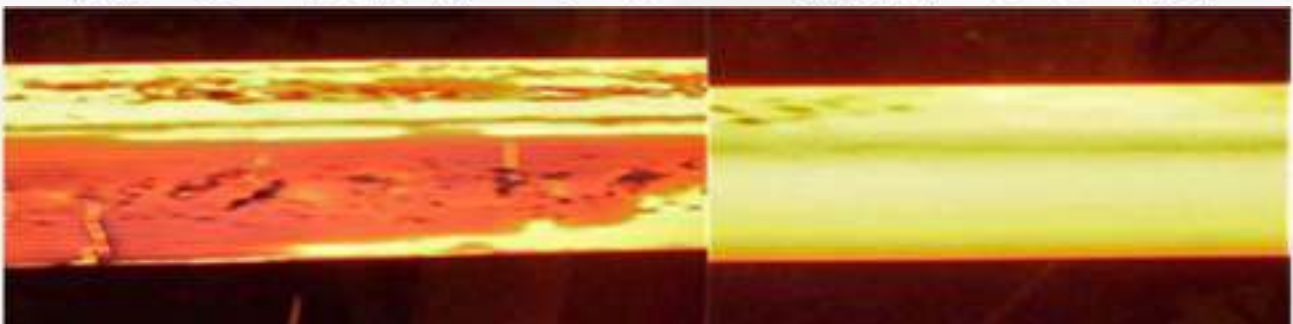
Billet WAVE marks visible when entering the mill but gone after second pass
